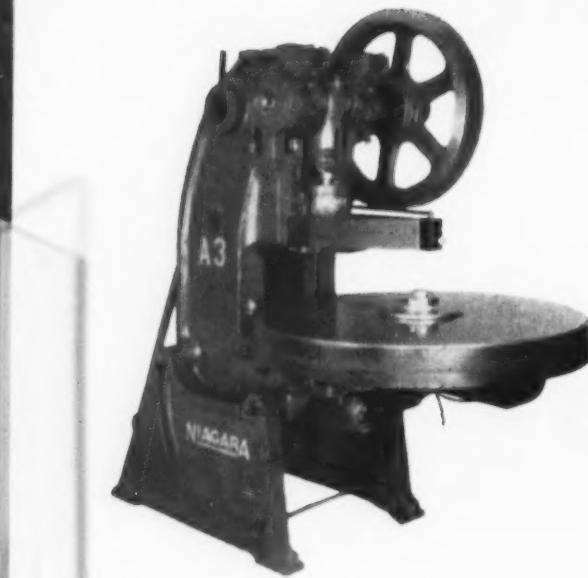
Power press equipped with under-drive dial feed. Illustration courtesy F. J. Littell Machine Company.
